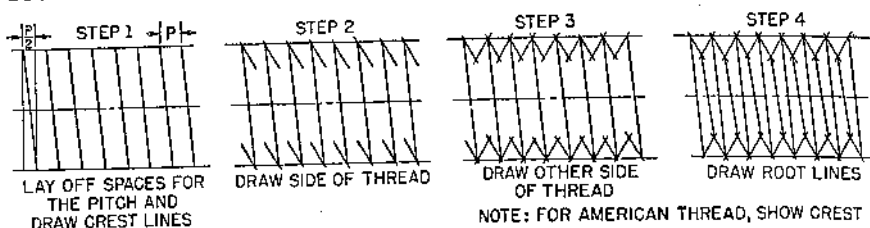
Progressive Stages in Drawing a Screw Thread.
